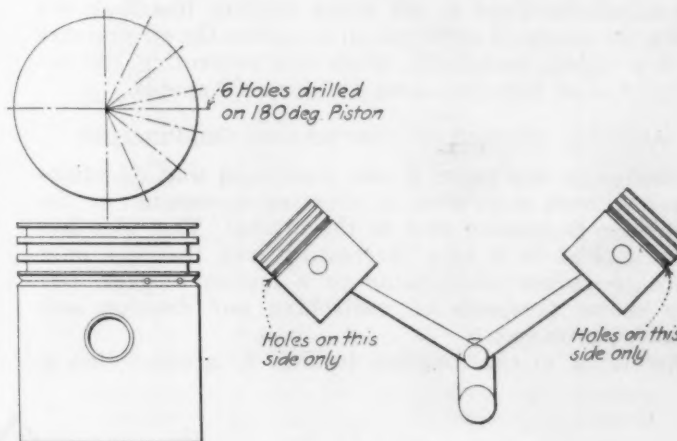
DRAWING SHOWING THE LOCATION OF OIL HOLES ON A V-TYPE ENGINE
